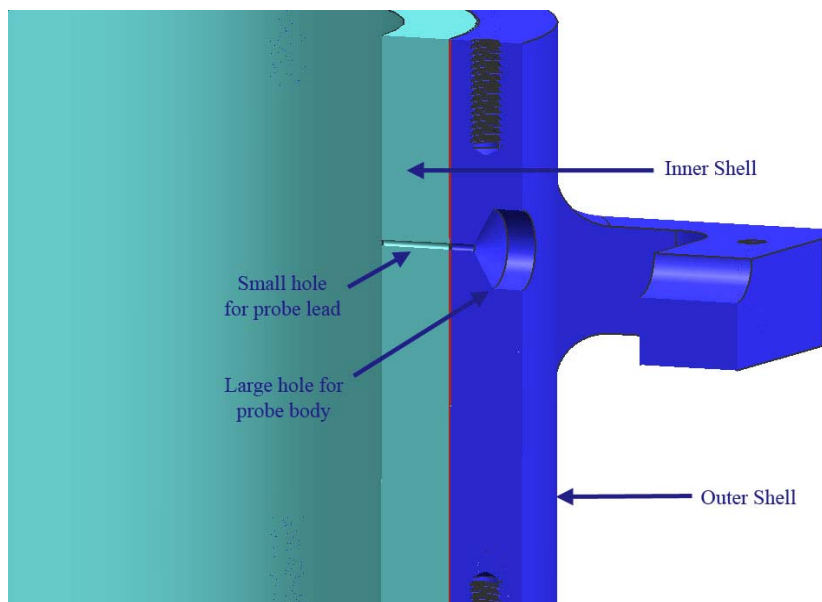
Cross-sectional view of the stepped hole drilled for the Gauss-meter probe
